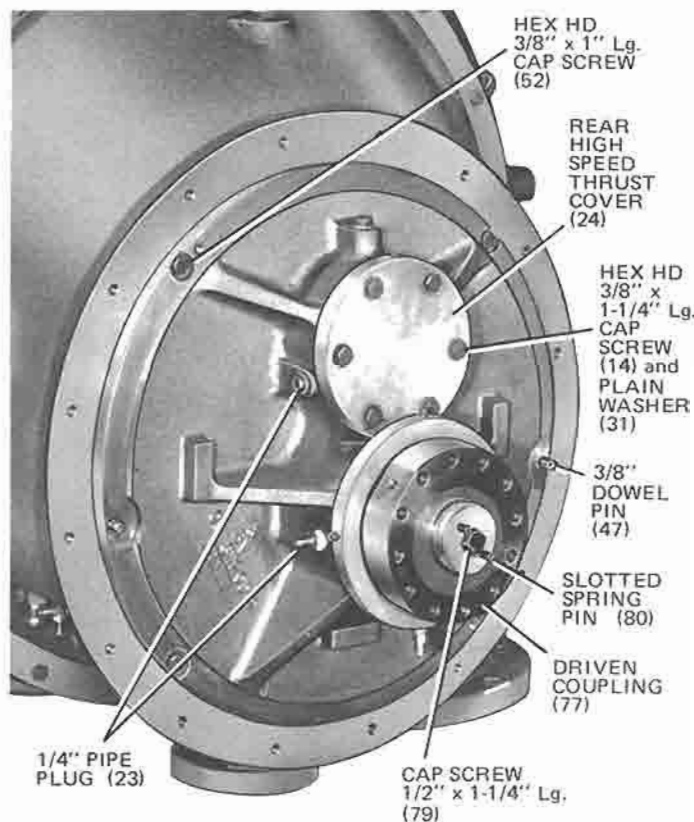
YJT COMPRESSOR ROTOR BEARING HOUSING ASSEMBLY
